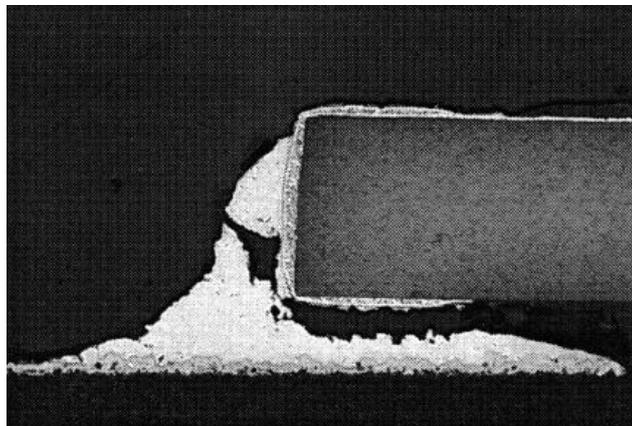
The crack and failure of the adhesive solder joint.
